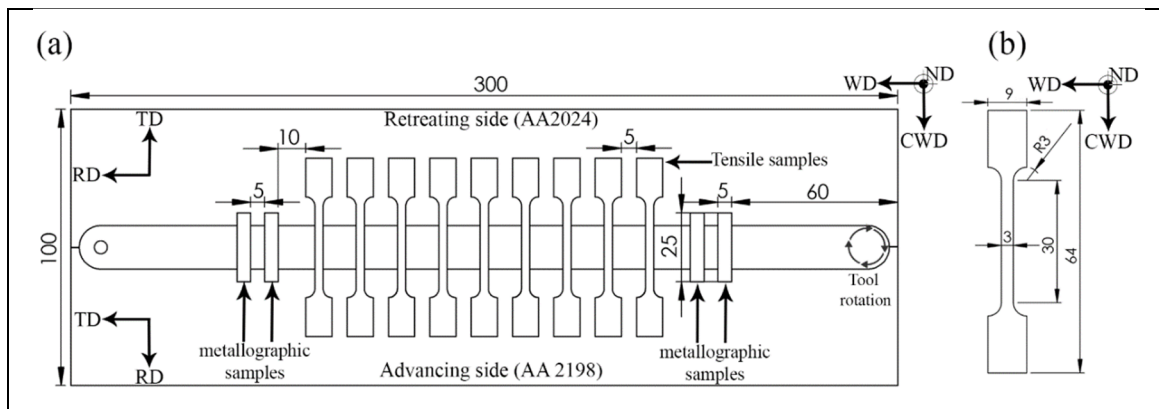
Experimental dissimilar friction stir welding process setup: a) Plates size and locations of the samples extraction. b) Geometry of the dog-bone tensile specimens. All the dimensions are in millimeter.
